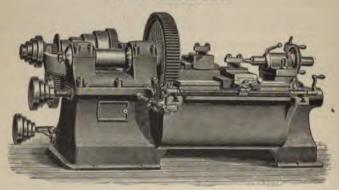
SHOWS 50" LATHE WITH BORING ATTACHMENT
